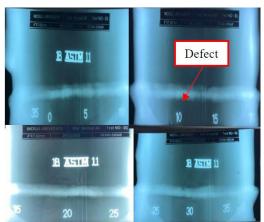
X-ray photograph after preheating for welding zone at a current of 100 Amperes.
